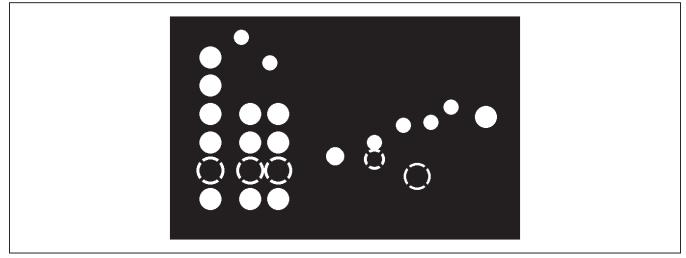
MAX44000PMB11 Peripheral Module PCB Layout—Inner Layer 1 (Ground)
